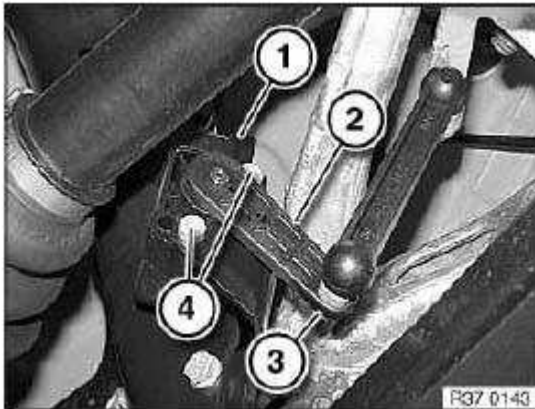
Plug Connection, Nut, Screws And Sensor Lever
